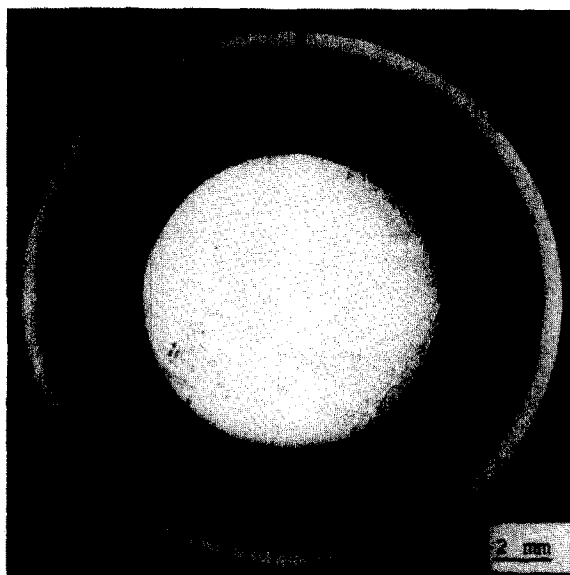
Transverse cross-sections of a fractured, cold-worked, unirradiated specimen.
